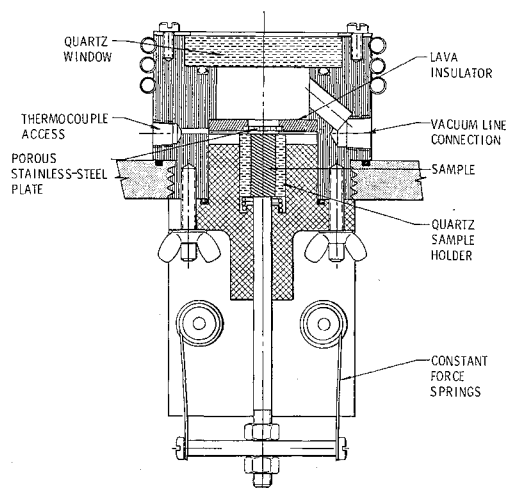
Assembly drawing of porous-plate holder and sample positioning arrangement.
